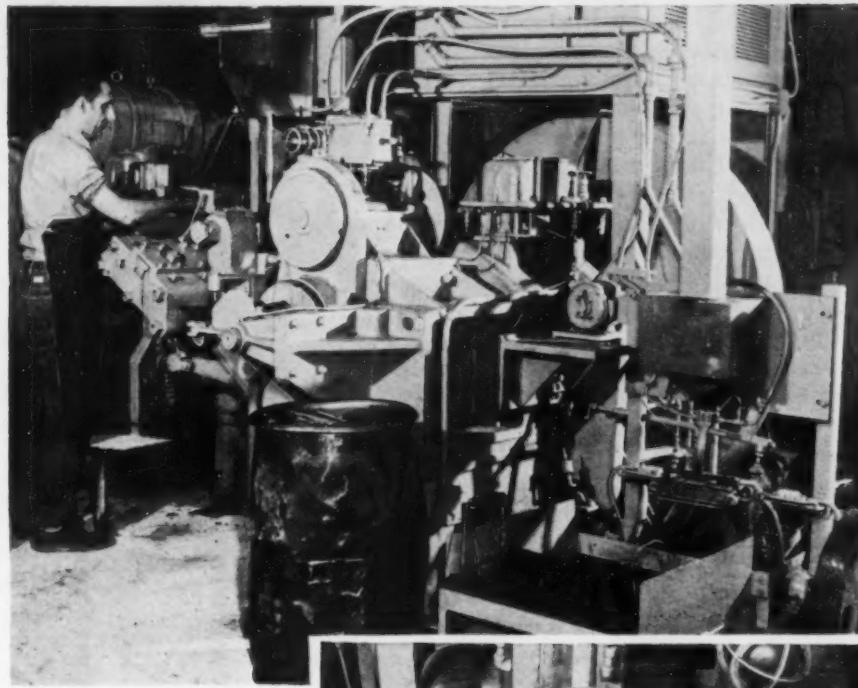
This machine heads both ends of valve push rods for Ford valve-in-head engines. The push rods are heated by coils of a 20-kva induction heater before heading and again before quench.
